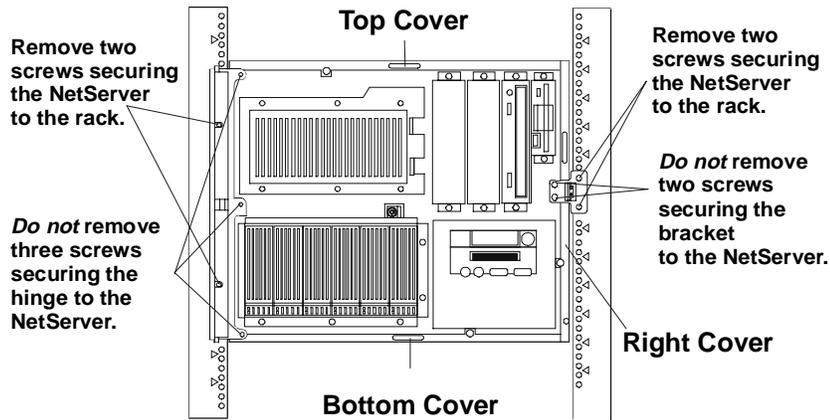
Front of LH 6000r - Screw and Cover Locations
